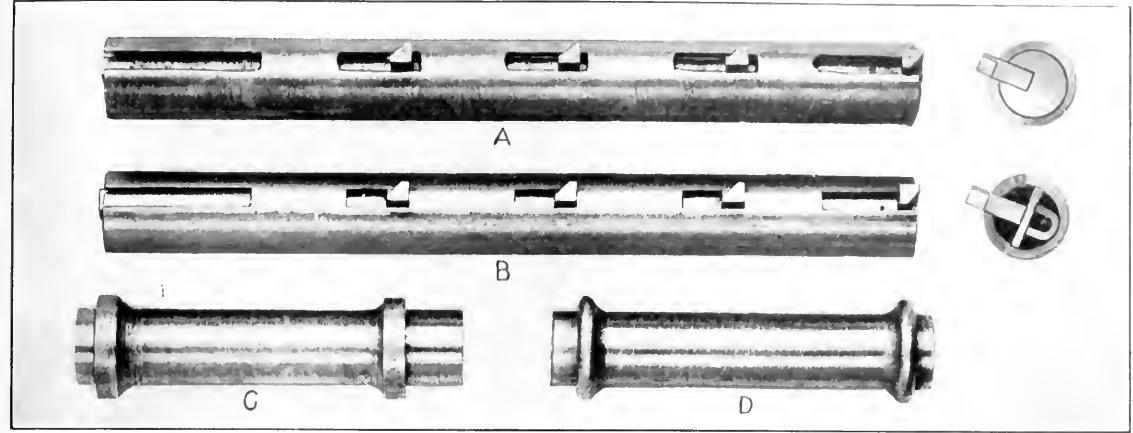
(A) Part machined from Bar; (B) Same Part produced from Sheet Steel in Dies; (C) Machined Spacer Tube; (D) Die-formed Spacer Tube
